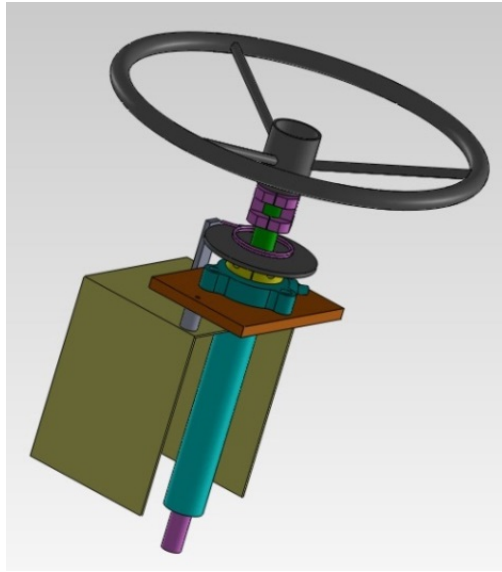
CAD Model of the Steering Wheel Angle and Torque Sensors Mounting Fixtures and Adapters.
